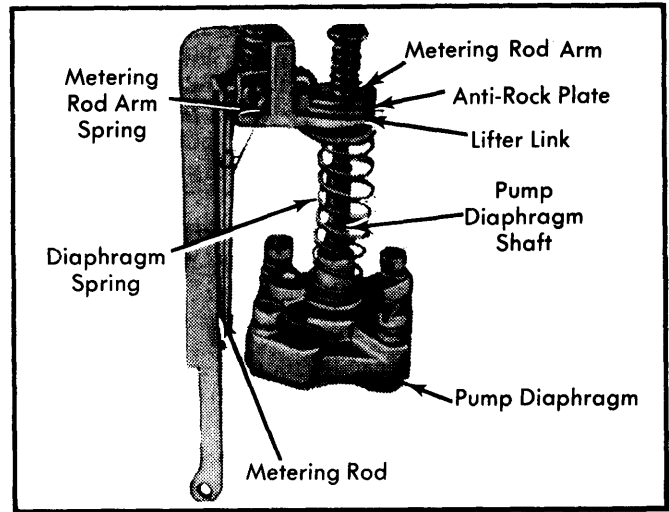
Assembled View of Accelerator Pump and Lifter Link Assembly
